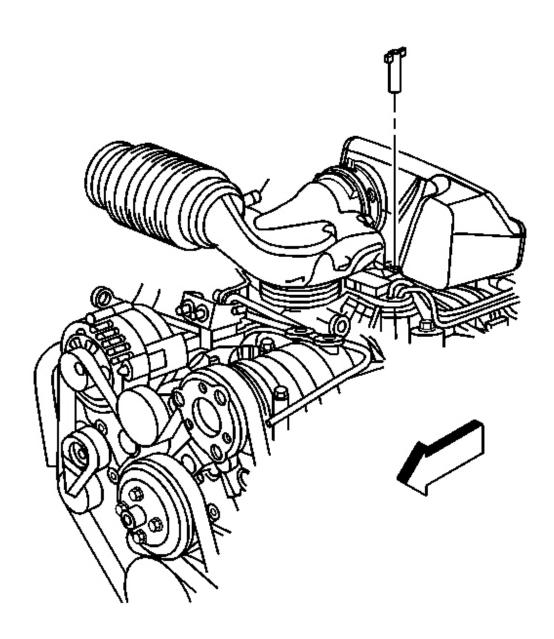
View Of Air Cleaner Adapter Nut Courtesy of GENERAL MOTORS CORP.
